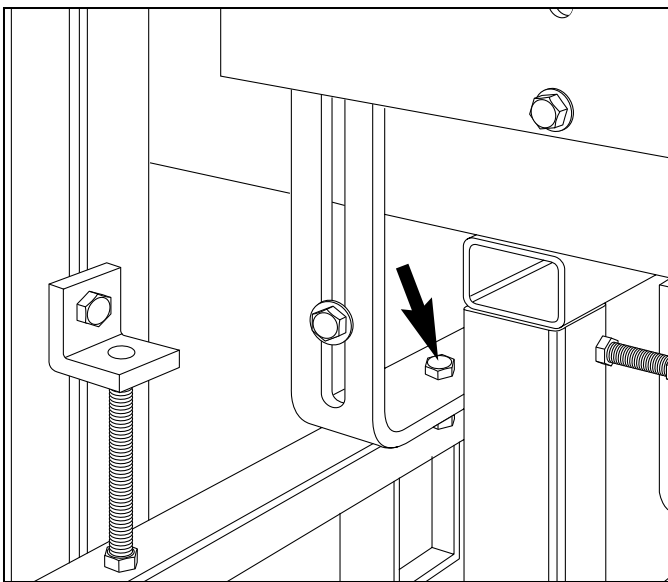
CONVEYOR BOLTED TO ACCUMULATOR
